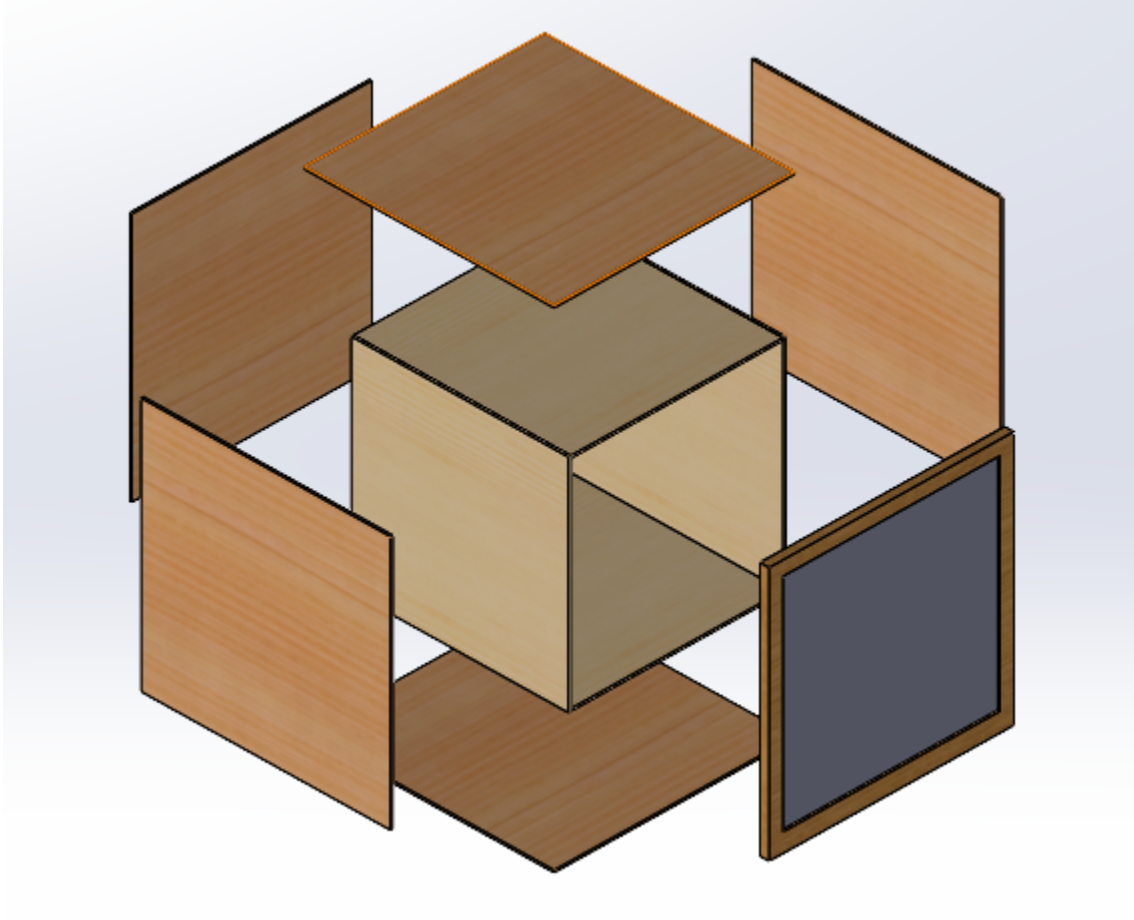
, Exploded View of Double Walled Insulated Testing Environment System. Exterior Walls are Shown in the Darker Wood, and Interior Shown in Lighter Wood
